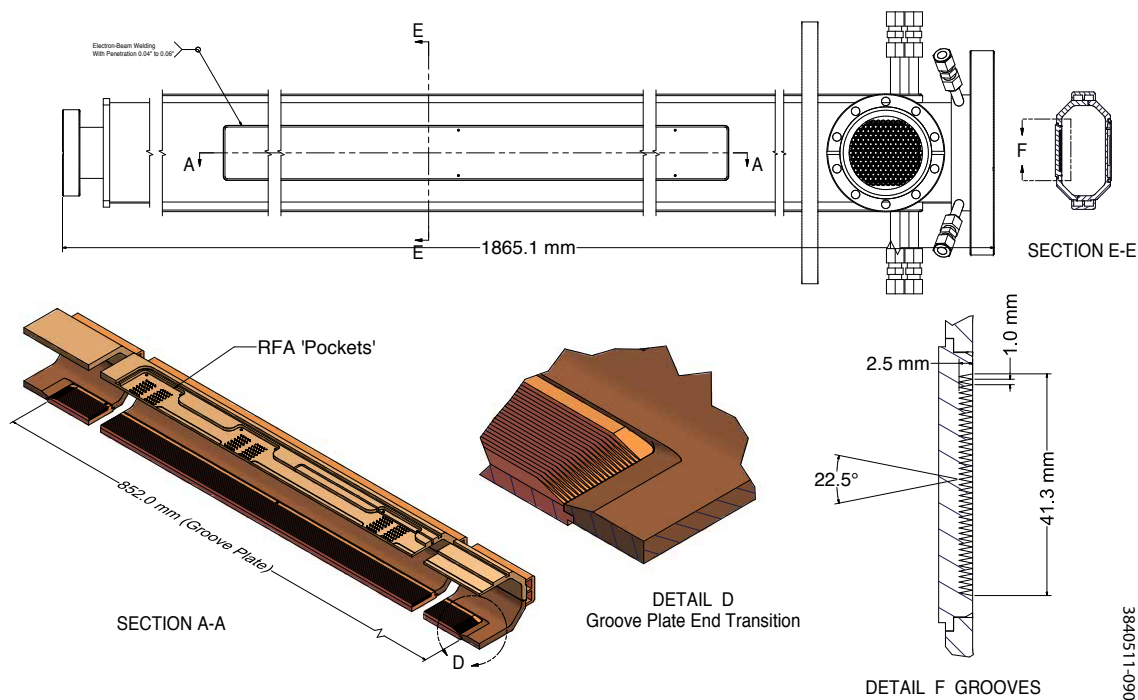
SCW RFA beam pipe with a groove plate EB welded to the bottom beam pipe.
